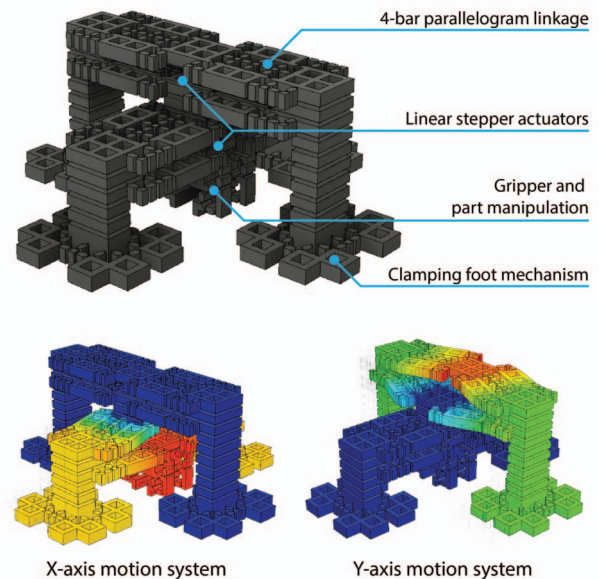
The assembler is assembled from a number of subsystems including linear motion modules, clamping feet mechanisms, and grippers that can manipulate parts. The assembler moves by actuating two of the feet at time.
